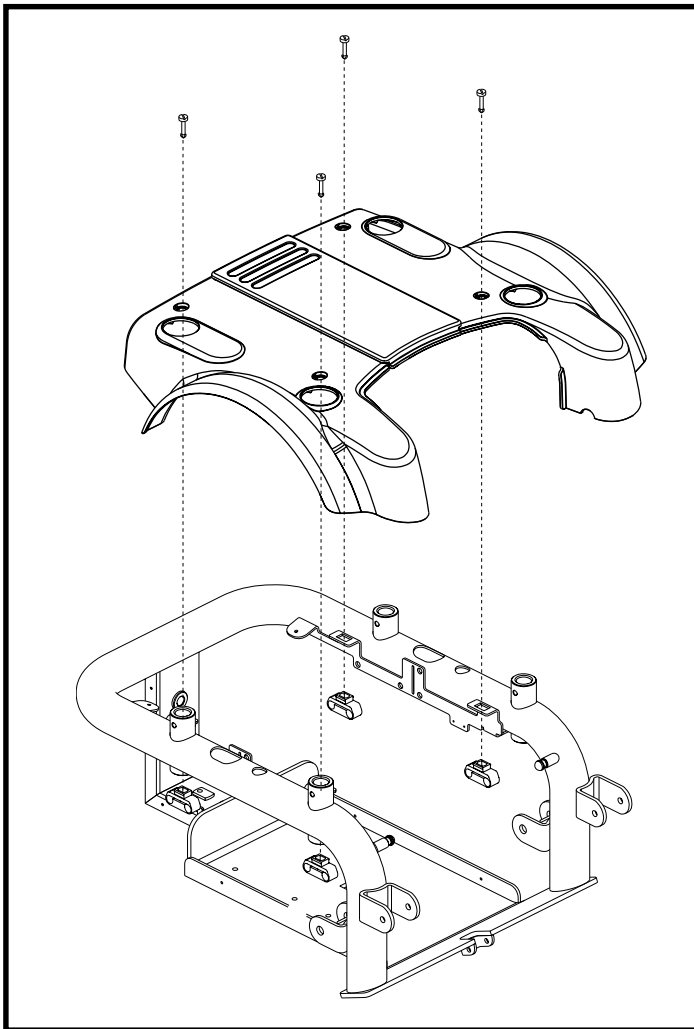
Jazzy 1121 Shroud Disassembly/Assembly
